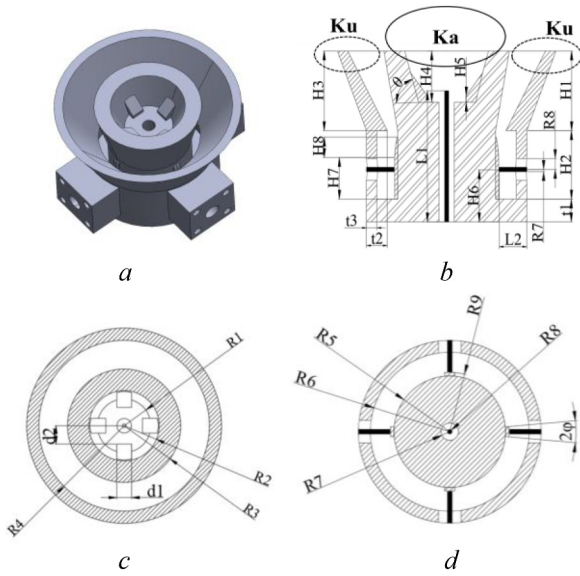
| Geometry of the feed horn: (a) isometric view, (b) cross-sectional view, (c) top view and (d) bottom view.
